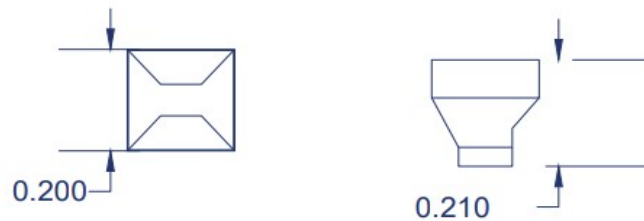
Isometric view of seed hopper a) Top view b) side view
